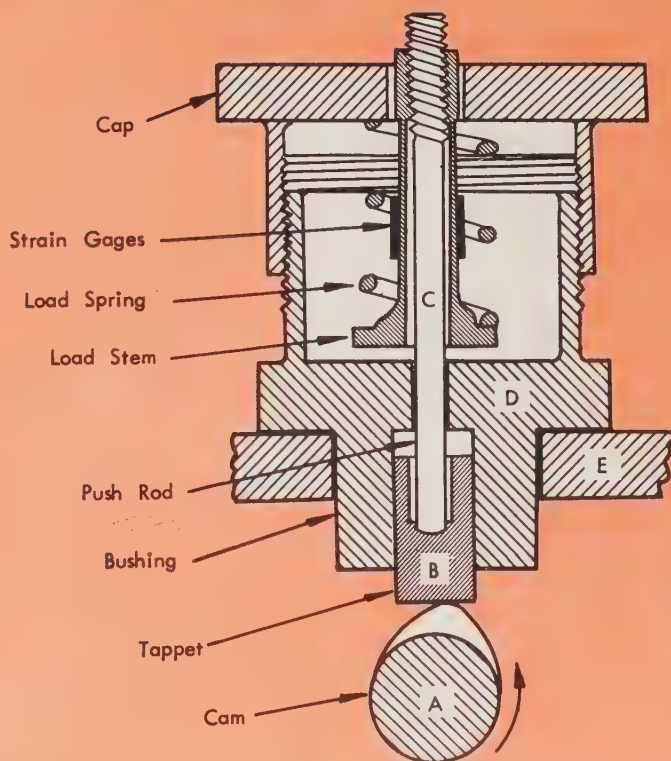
This schematic diagram of the bench test machine shows the method of loading. The camshaft section *A* is driven by a ½-hp electric motor through a timing belt and toothed pulley system, and the tappet *B* is held against the rotating cam by a spring-loaded push rod *C*. The tappet rides in a bushing *D* attached to a loading head *E*, which is moved to position the tappet over the cam. Any type of tappet may be used by making the bushing to fit the tappet body, and the machine will accommodate either line-6 or V-8 design camshaft sections.
